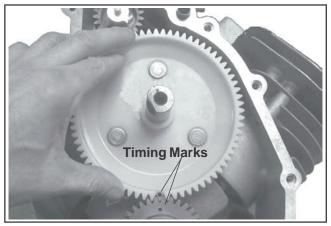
Installing Camshaft and Aligning Timing Marks.
